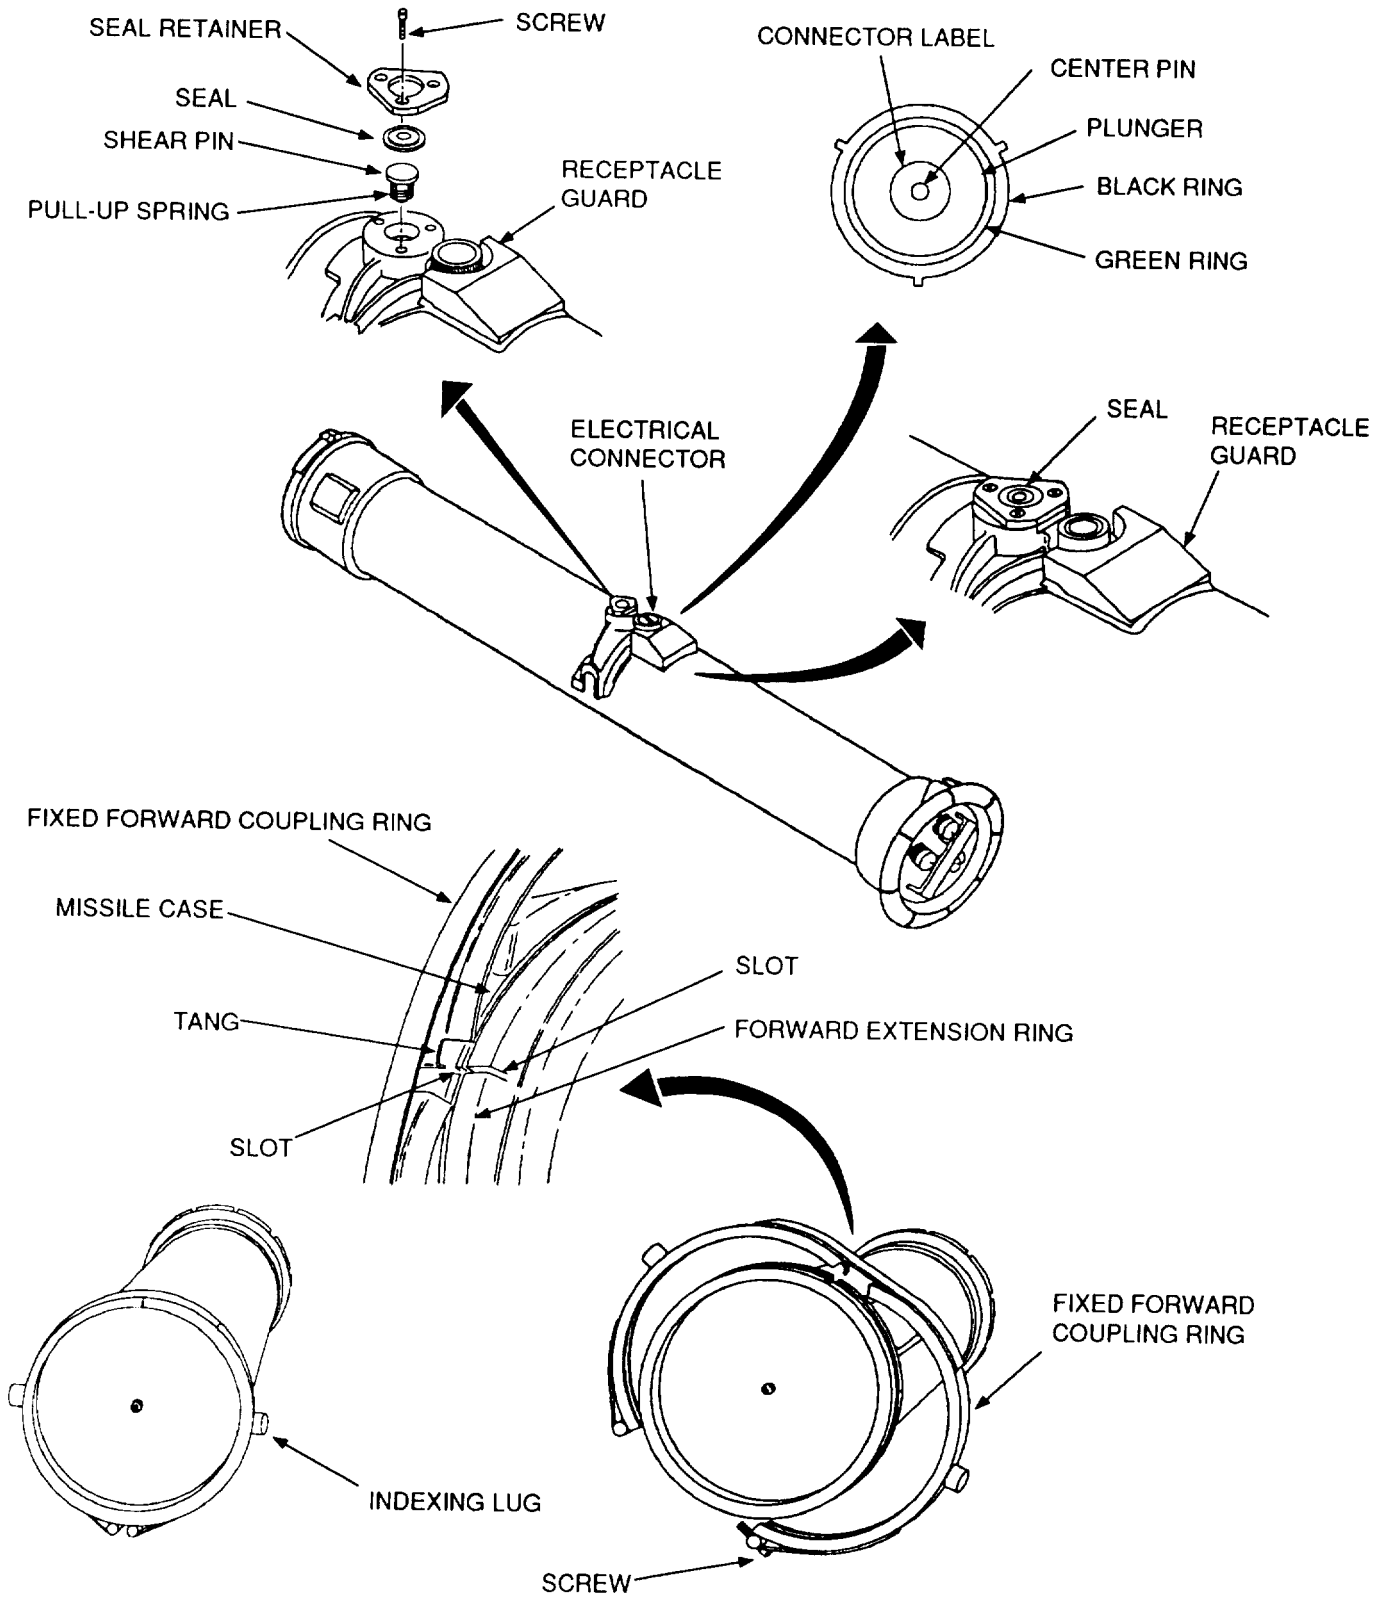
Missile Simulator Inspection Points (Sheet 1 of 2)
